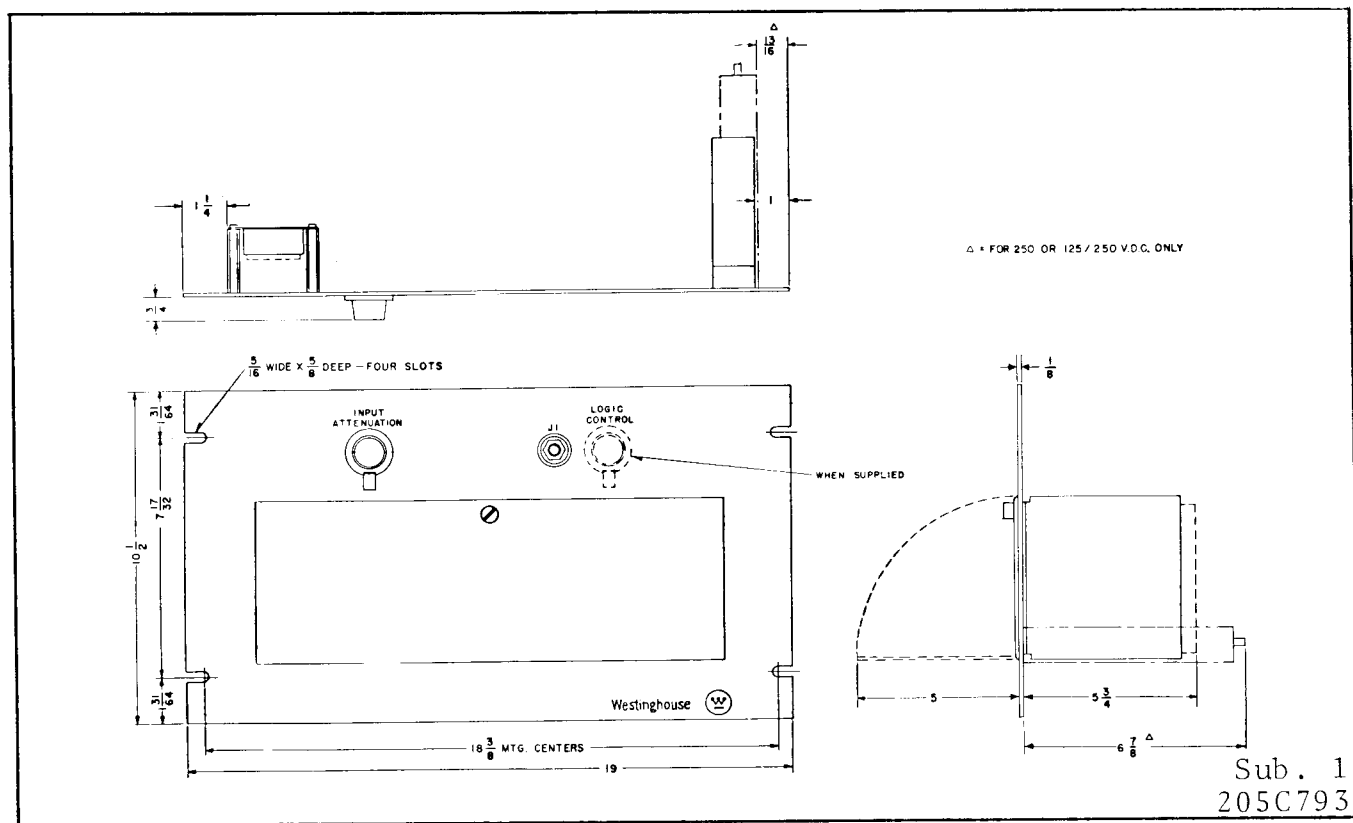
Outline and drilling plan for the type TCF receiver assembly.
